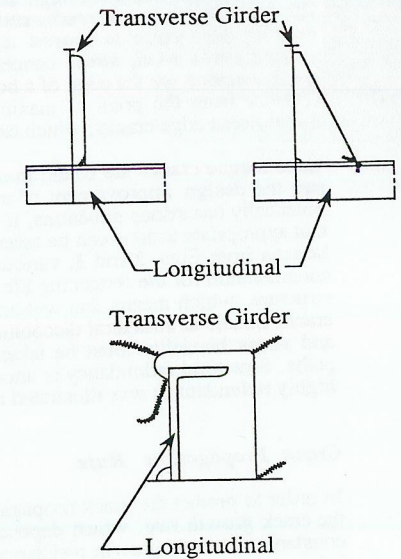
Fatigue cracks in transverse girders in 1970's.
